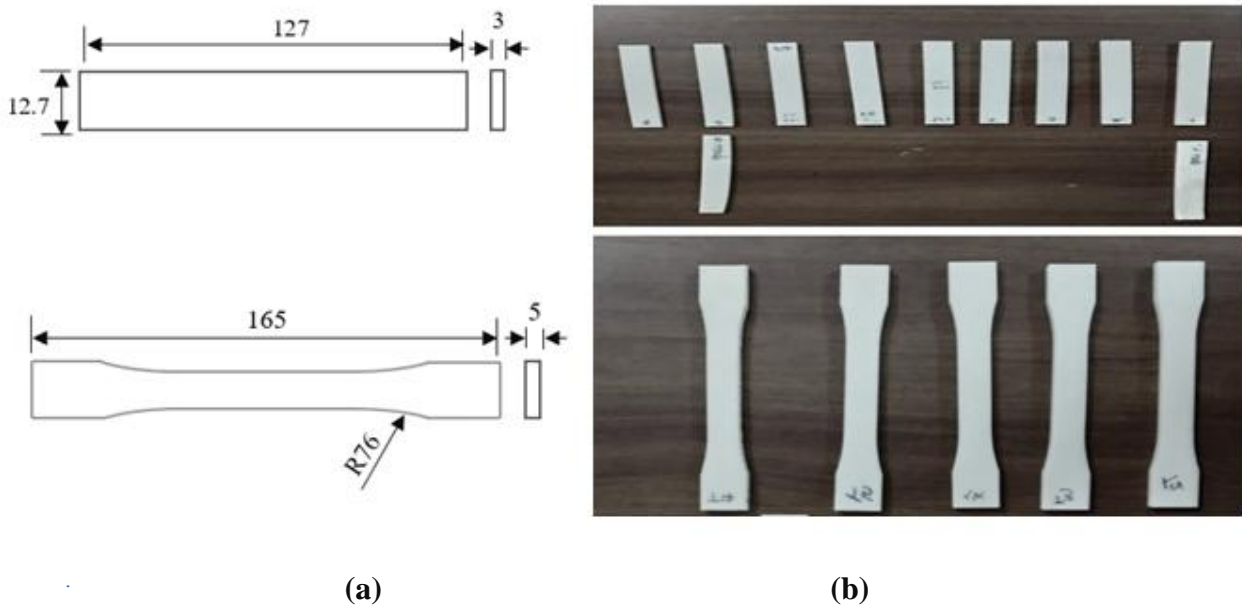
(a) ASTM D638 Type III in two dimensions & (b) Test specimens for flexural and tensile tests parts printed using FDM
